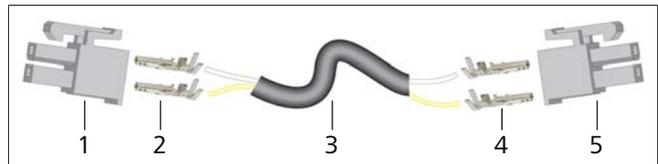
CI-BUS interconnection cable assembly between two CI-BUS units
